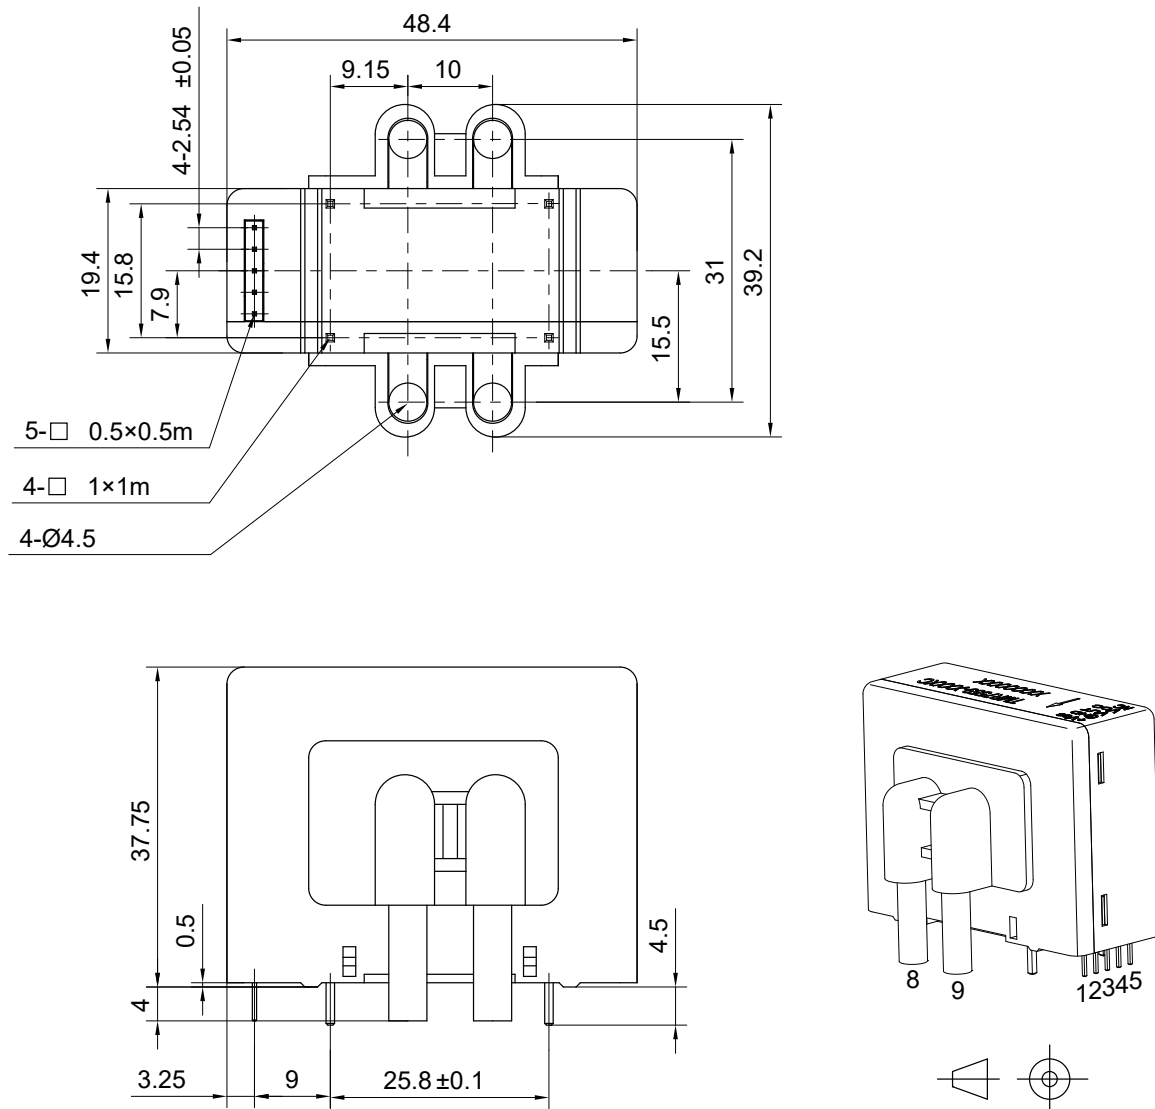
Dimension (unit: mm, tolerances for unmarked scales ±1 mm)
